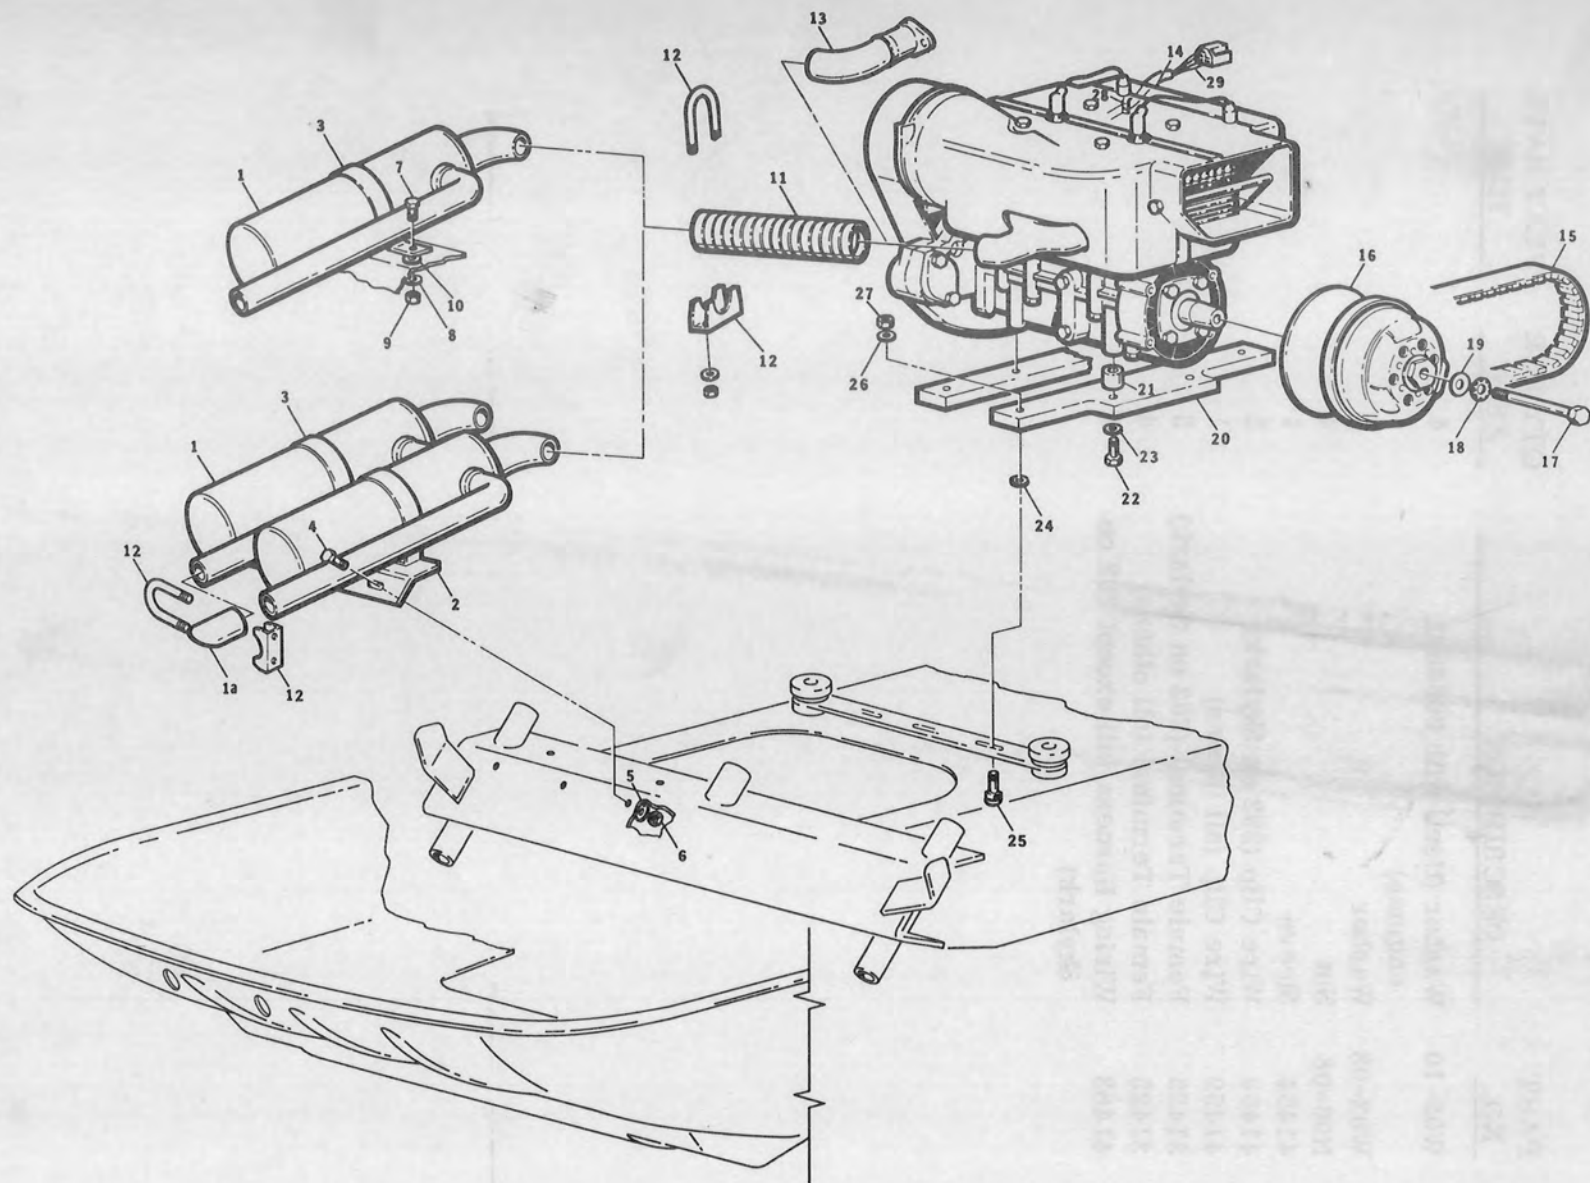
MUFFLER AND ENGINE MOUNTINGS - CHAPARRAL
